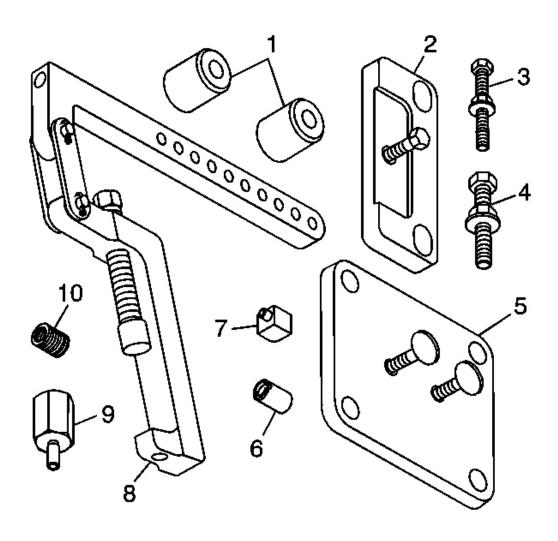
Identifying Rod Bearing Clearance Tool - Adapter Kit Courtesy of GENERAL MOTORS CORP.
